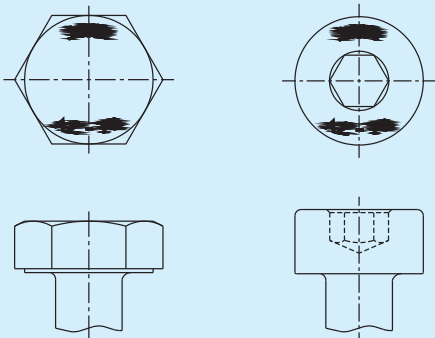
MARKING OF BOLTS AND SCREWS – Examples
